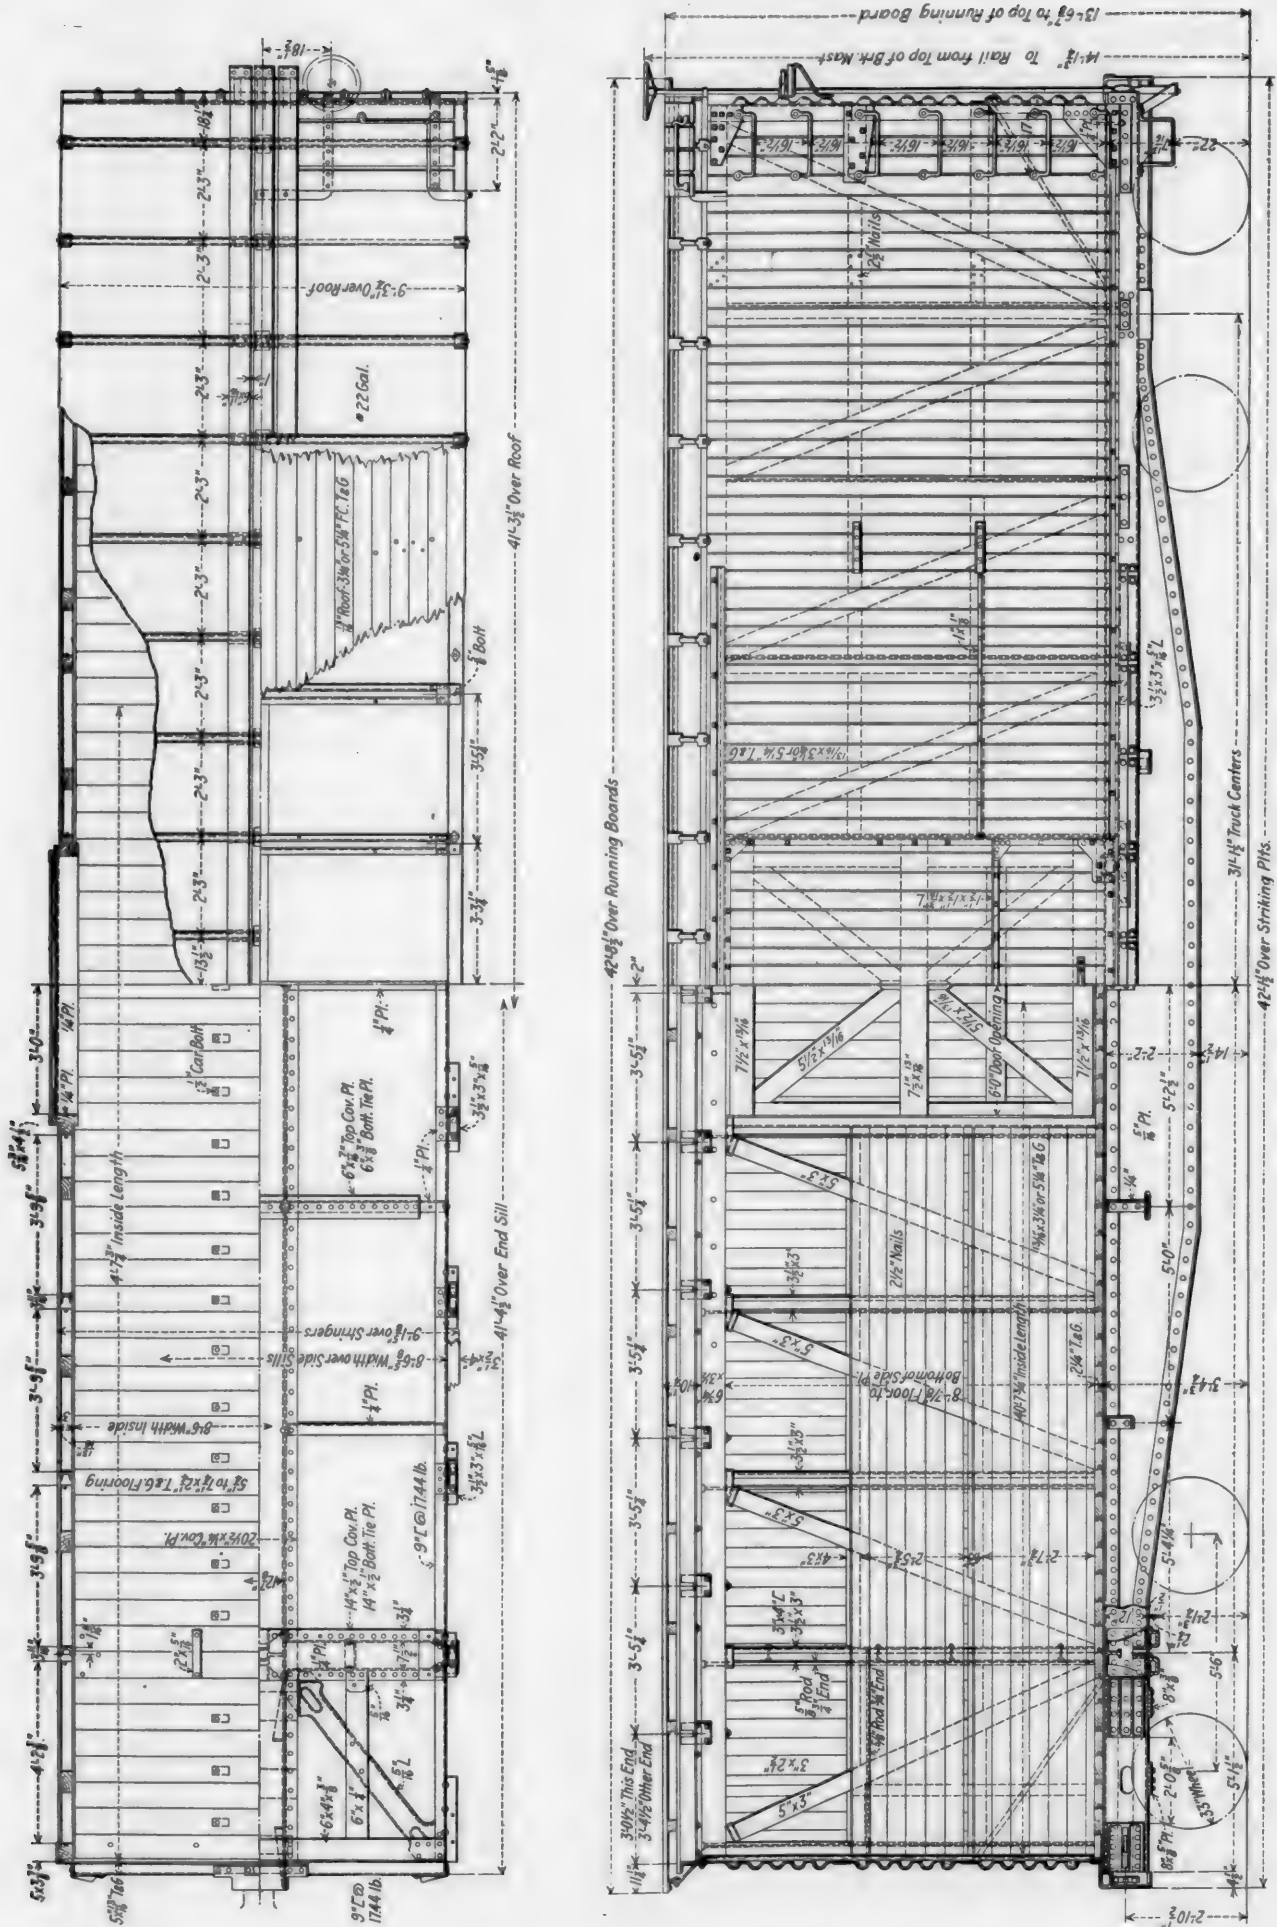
General Plan for the Standard 40-Ton Double Sheathed Box Car
